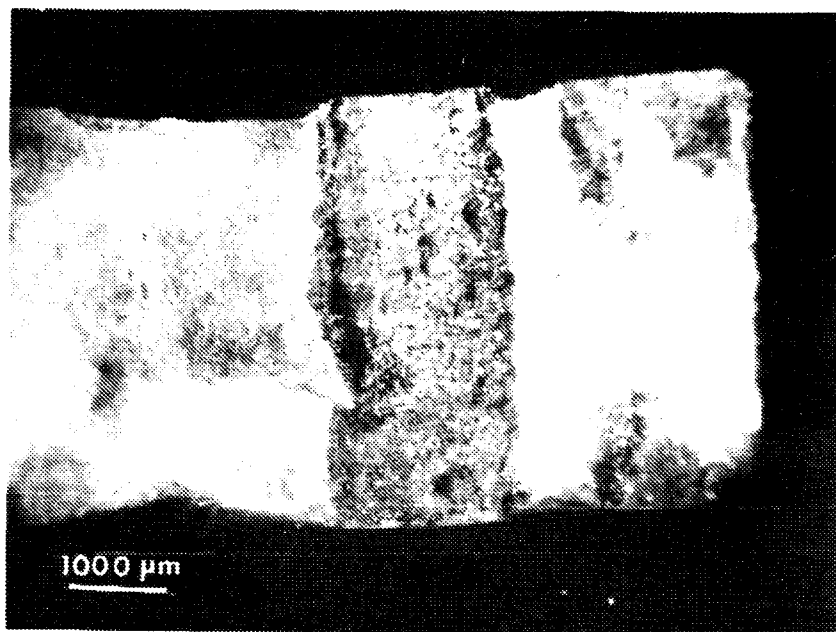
Crack Arrested by the Weld Metal
